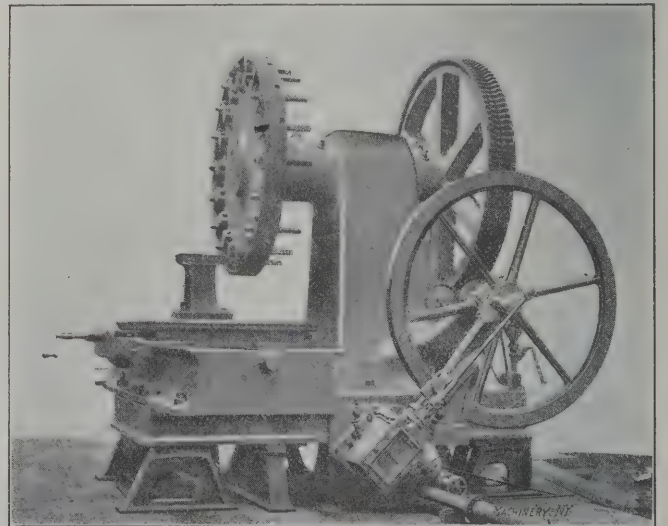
Very Large Type of Milling Machine, driven by Steam Engine. Joseph Whitworth & Co. (About 1867)
